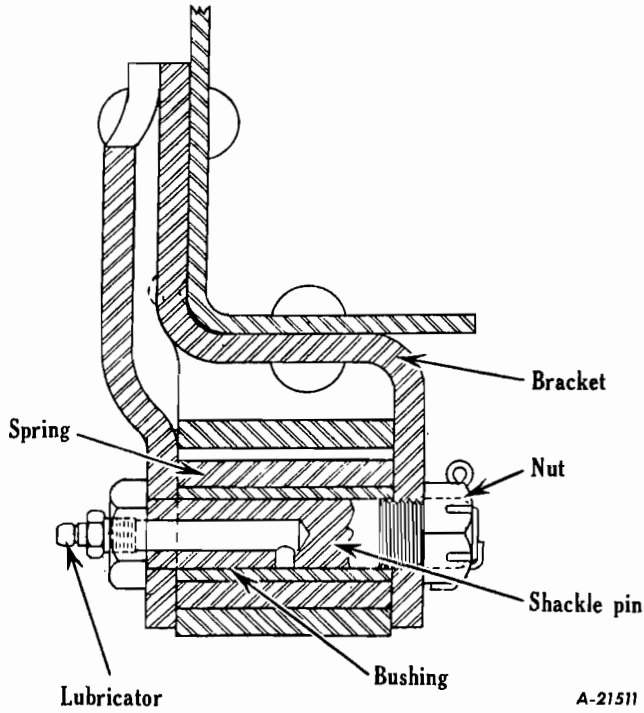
Front Spring Front Bracket For Models L-150, L-153, L-160, L-163, L-164, L-165, LC-160, L-170, L-173, L-174, L-175, LF-170, L-180, L-183, L-184, L-185, LC-180.
